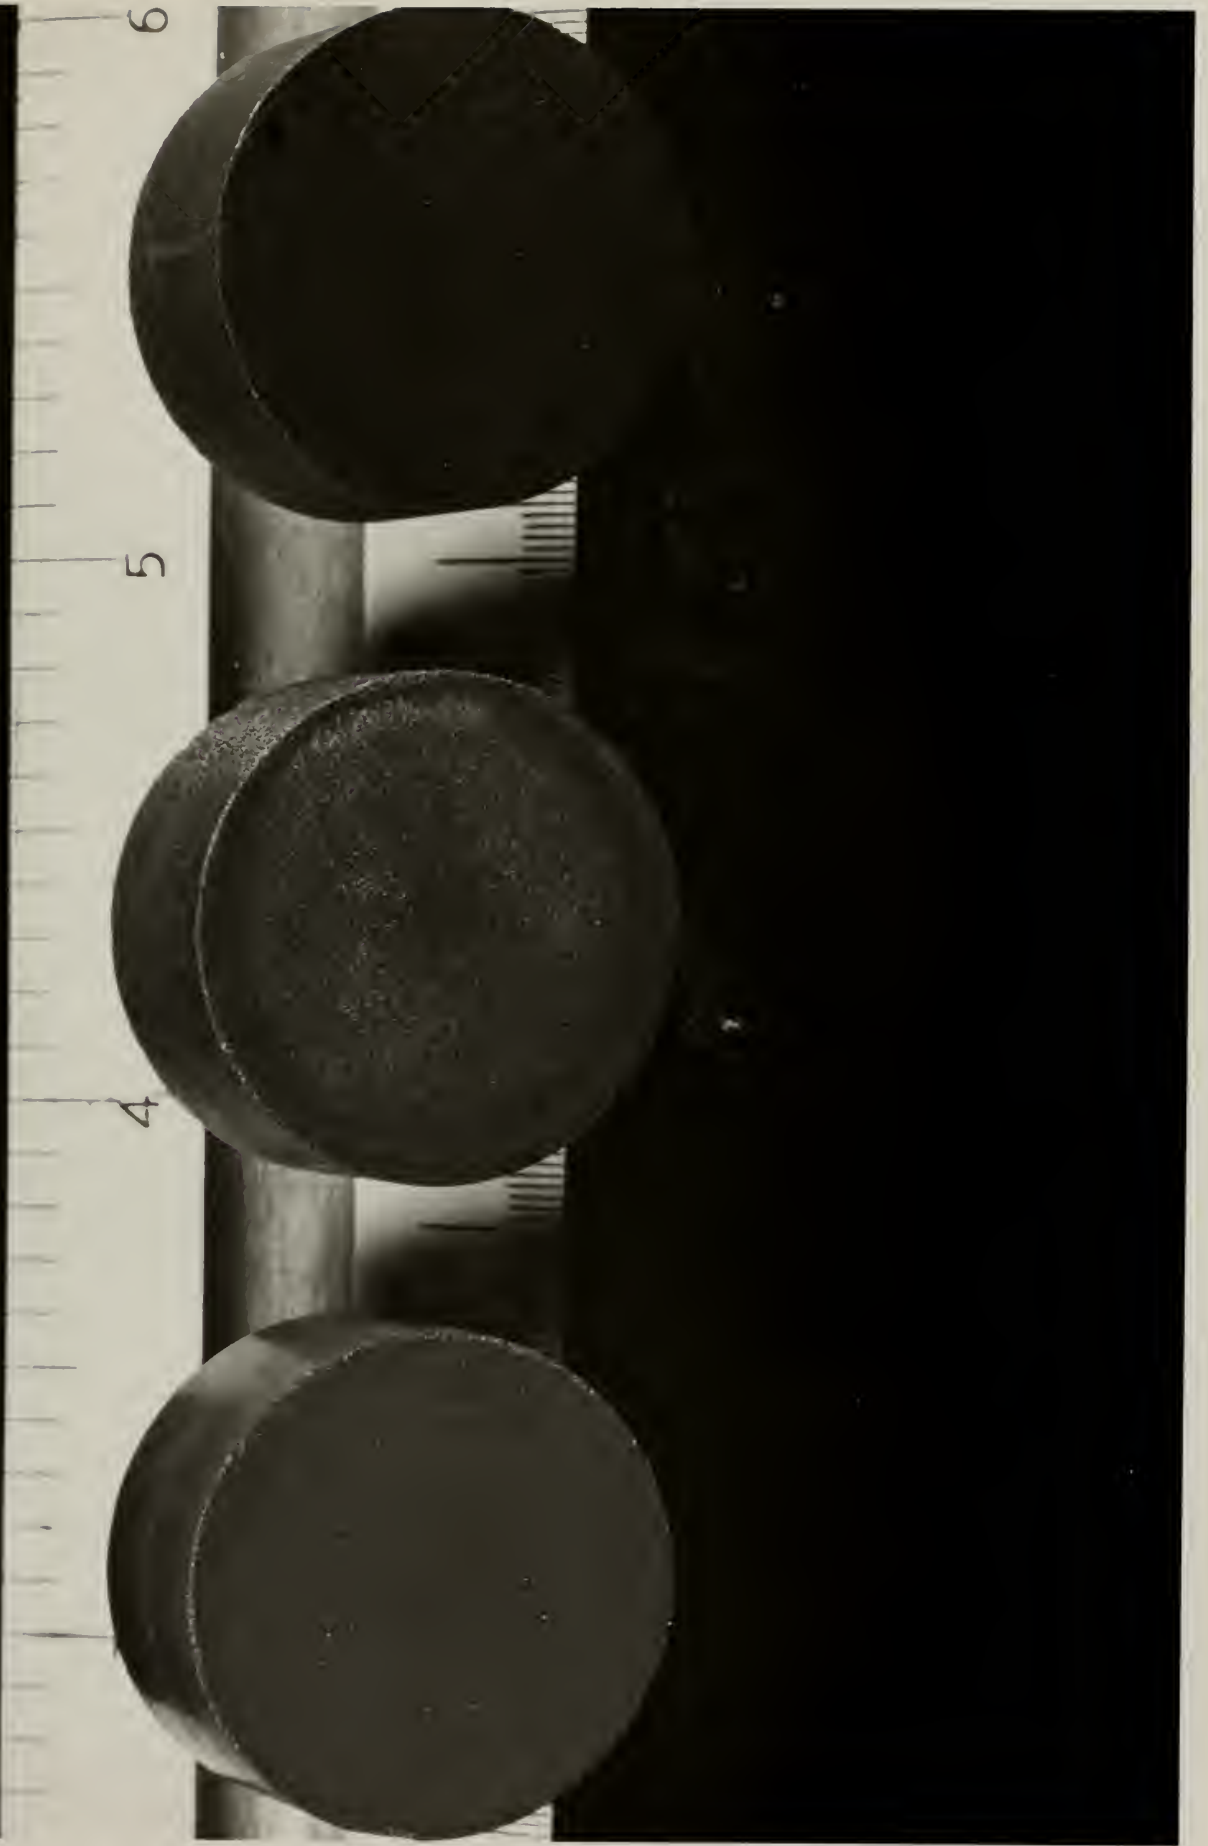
Specimens After Pressing (Left), Blistering (Center) and Edge Wrinkling (Right)
